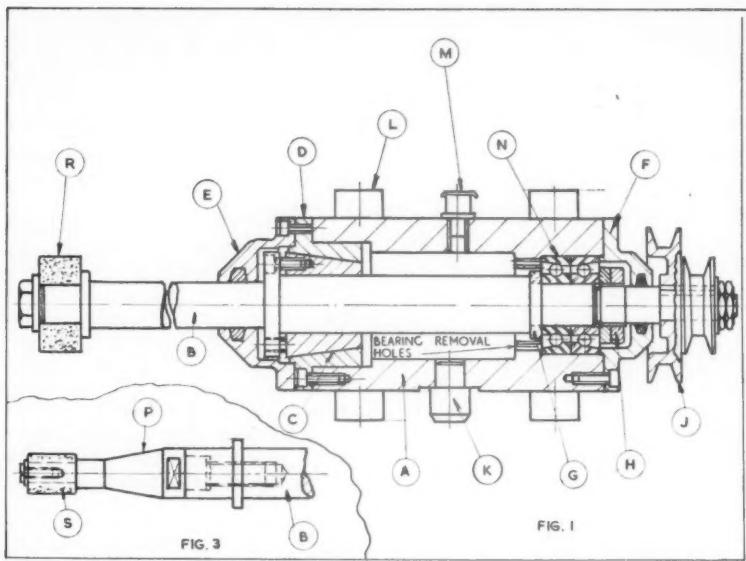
Tapered style of front bearing which is easily adjusted by means of the grub screws after the front cover has been removed. Fig. 3.—Extension spindle fitted into a pilot bored in the front end of the grinding wheel main spindle.
